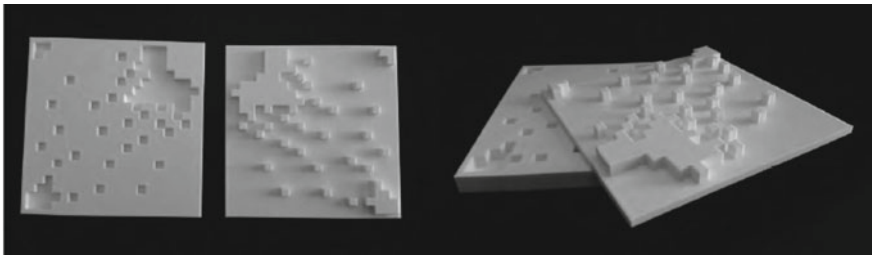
Cast tool for the embossy realized using a fdm 3d printing machine and PLA
